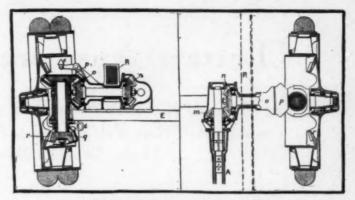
(1) Vertical section of rear wheel with driving and steering mechanism; s, brake attachment; t, steering attachment—(2) Horizontal section of front wheel and adjacent driving conections. For details see text
